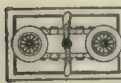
PRINCIPAL PARTS OF TIRE MOLD, CORE AND SUPPORT
